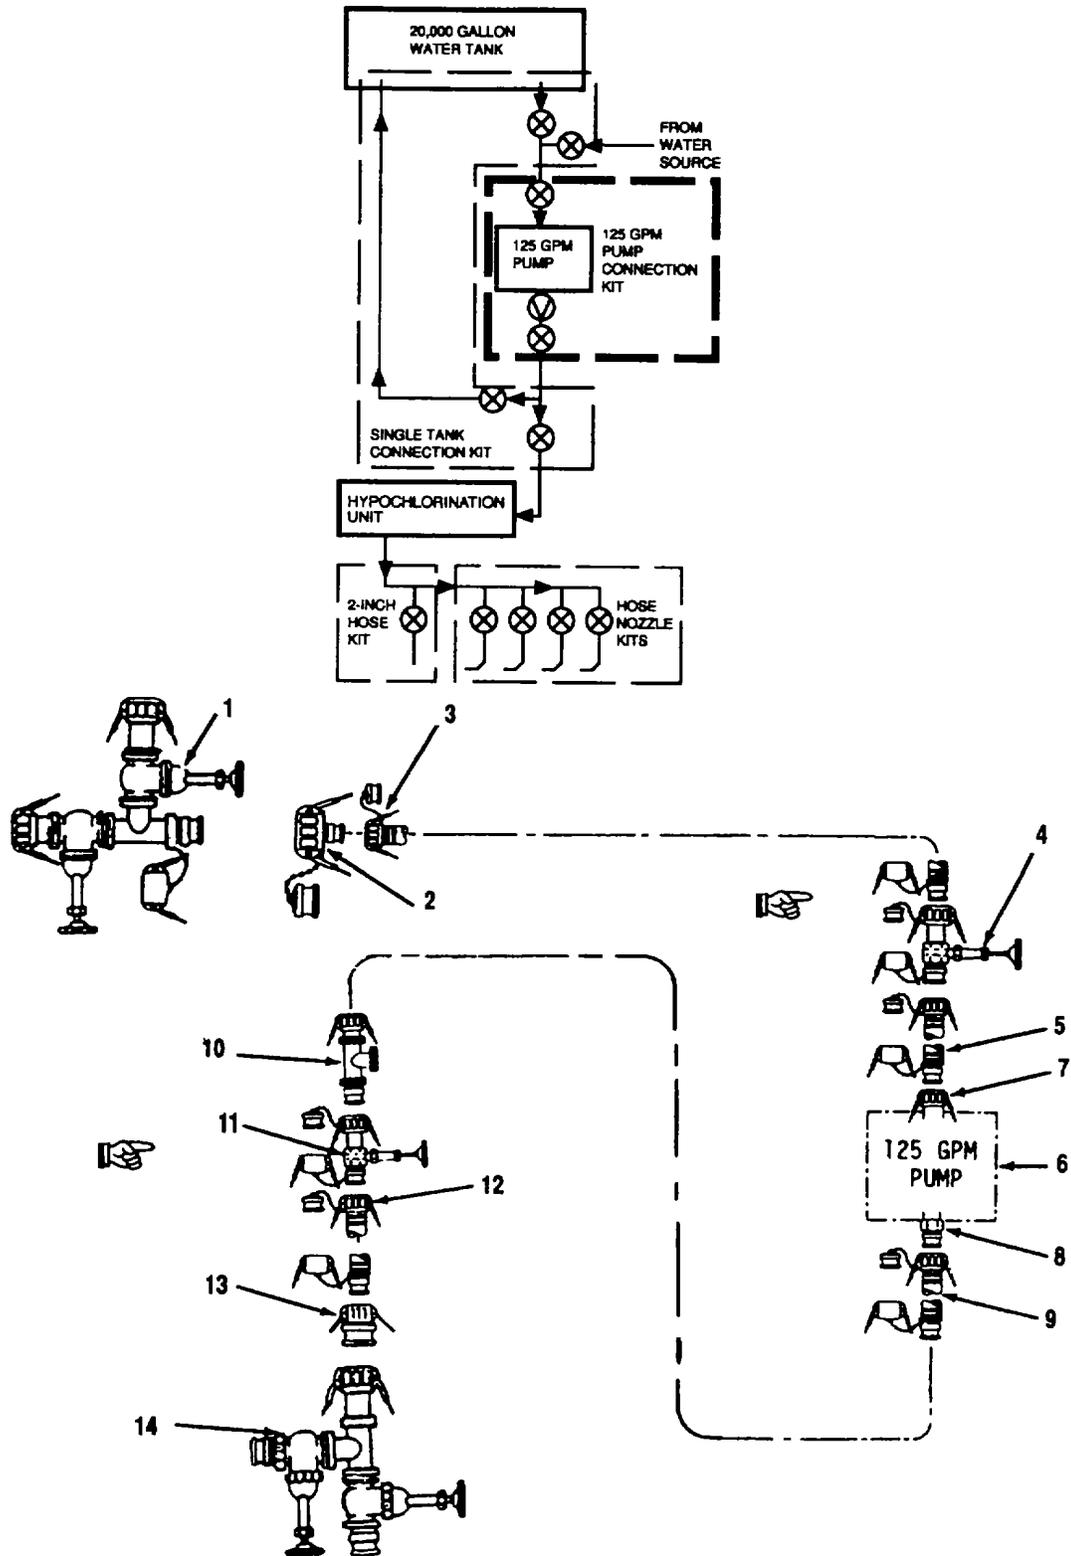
125 GPM Pump Connection Kit Disassembly
